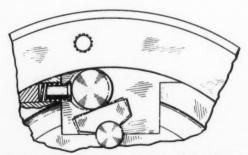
Carrier is eccentric to clutch bore, thus spreading roll wear on contact blocks
